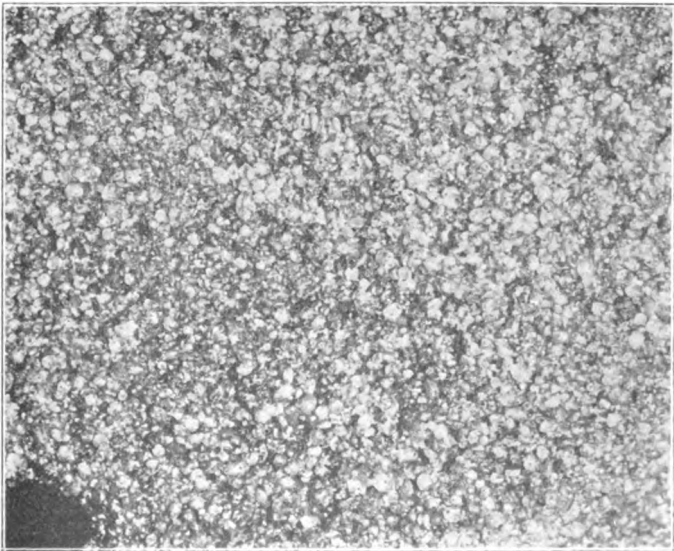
OIL-SAND CORE FOR GAS STOVE BURNER
